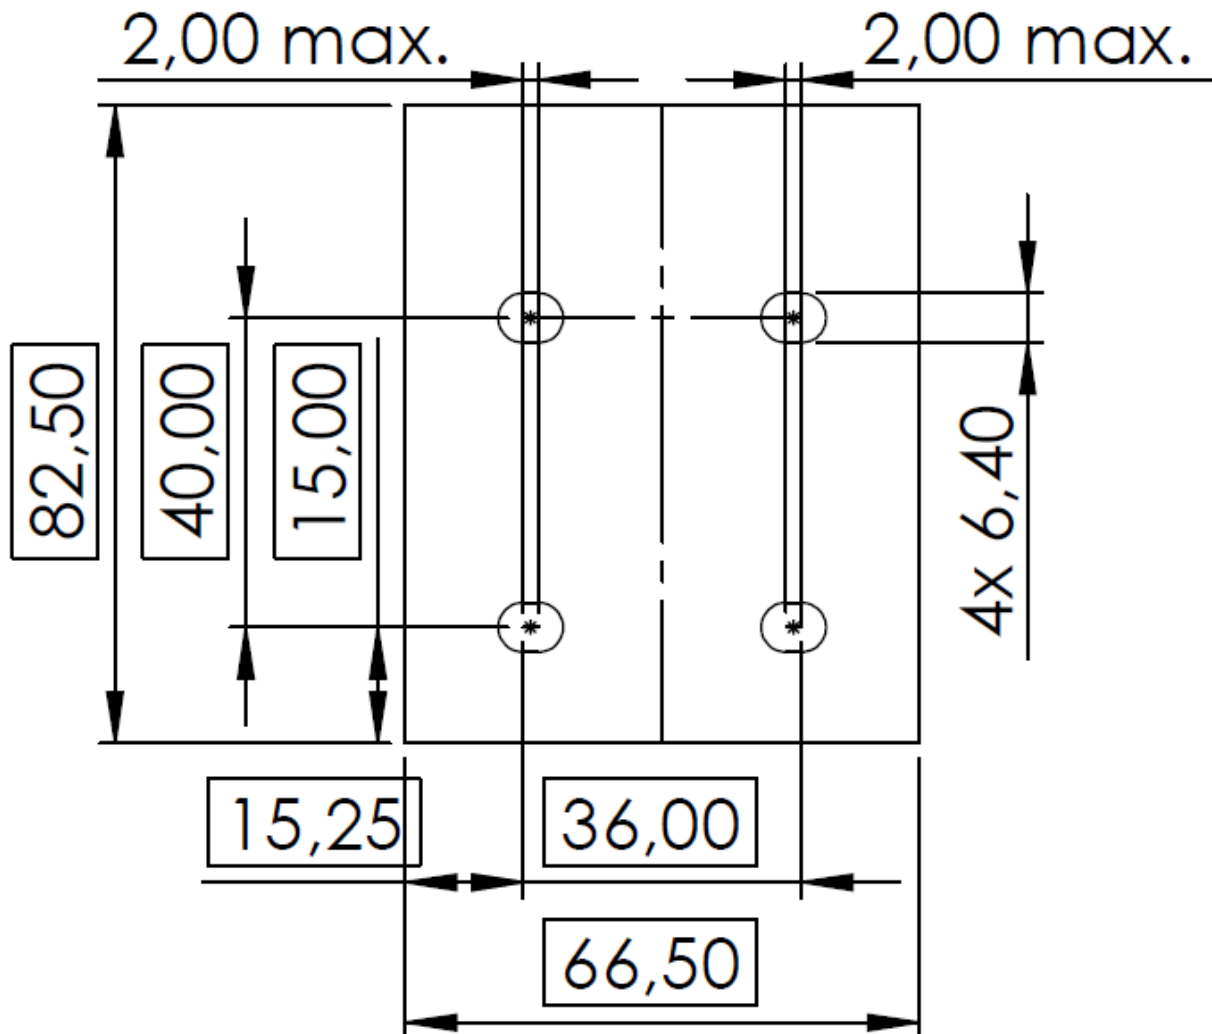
Slotted Hole Modification; nominal dimension of hole centre positions are put in boxes
